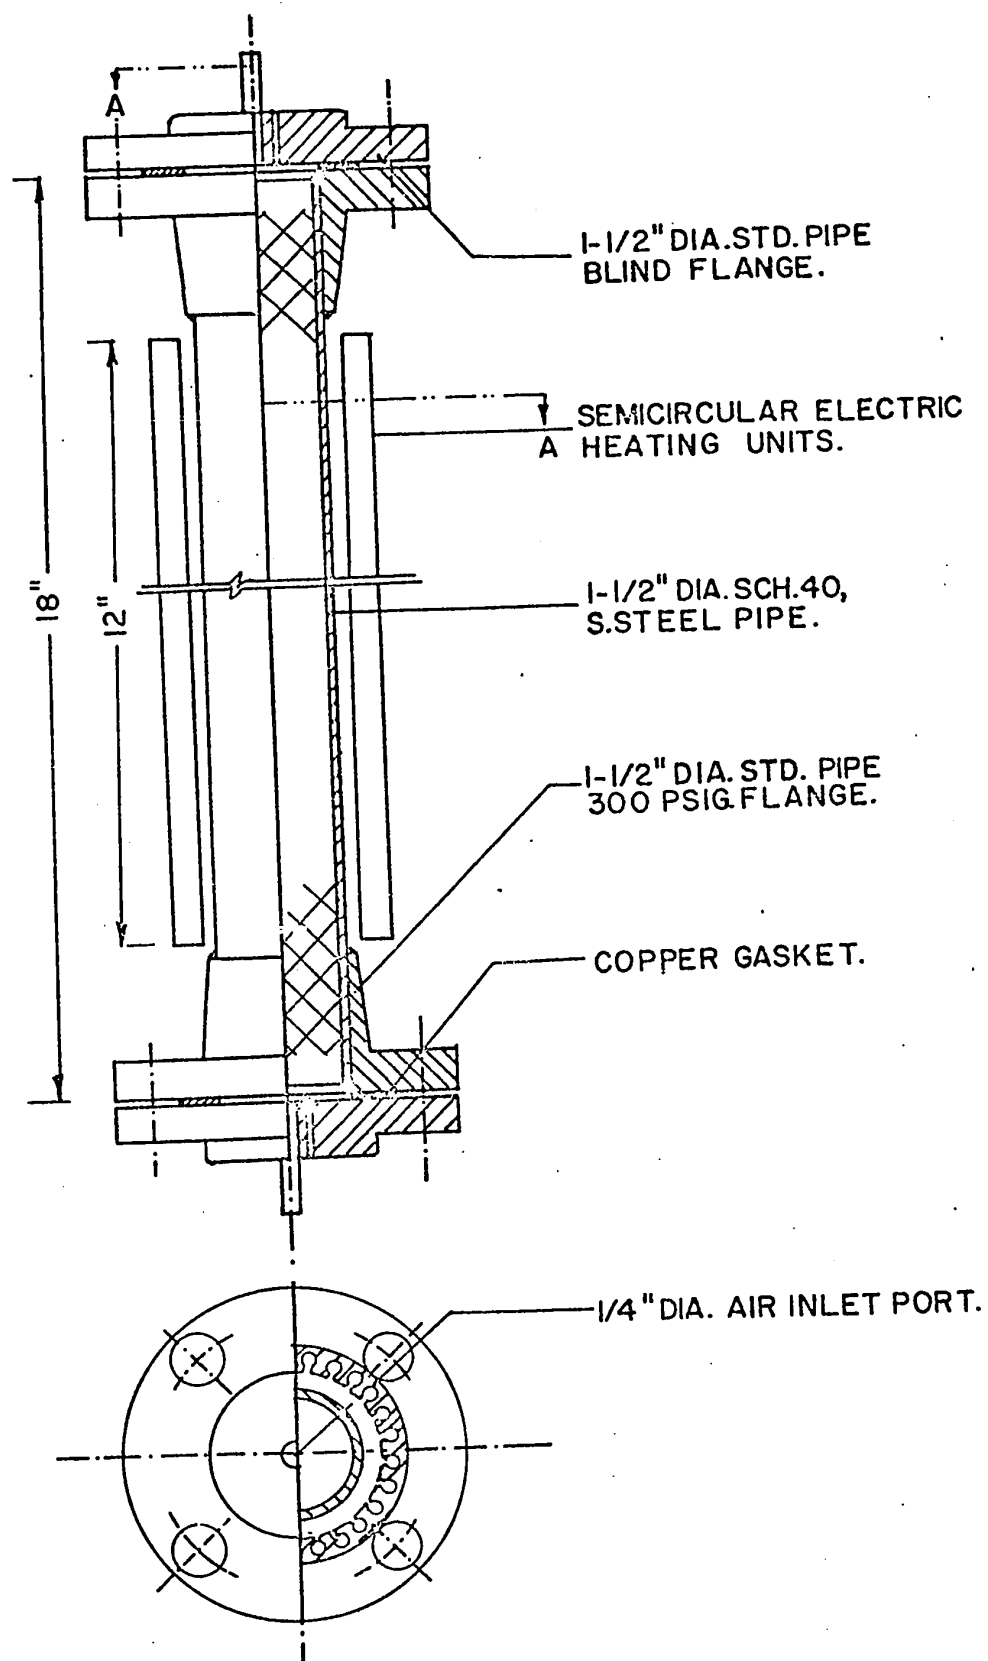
SECTIONAL VIEW OF THE PREHEATER.
